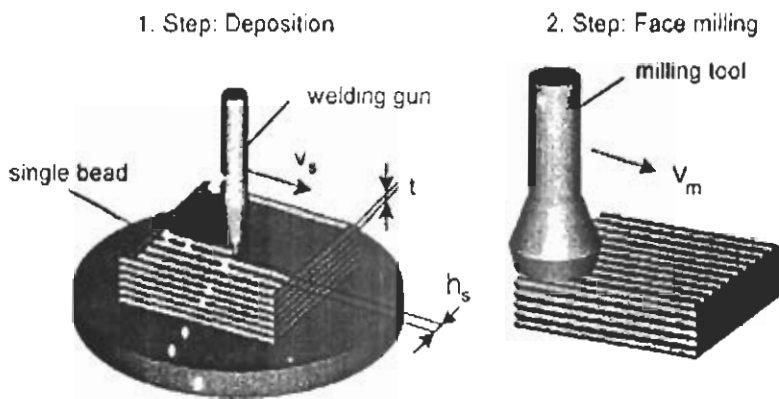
Schematic of Welding based rapid prototyping [40]
